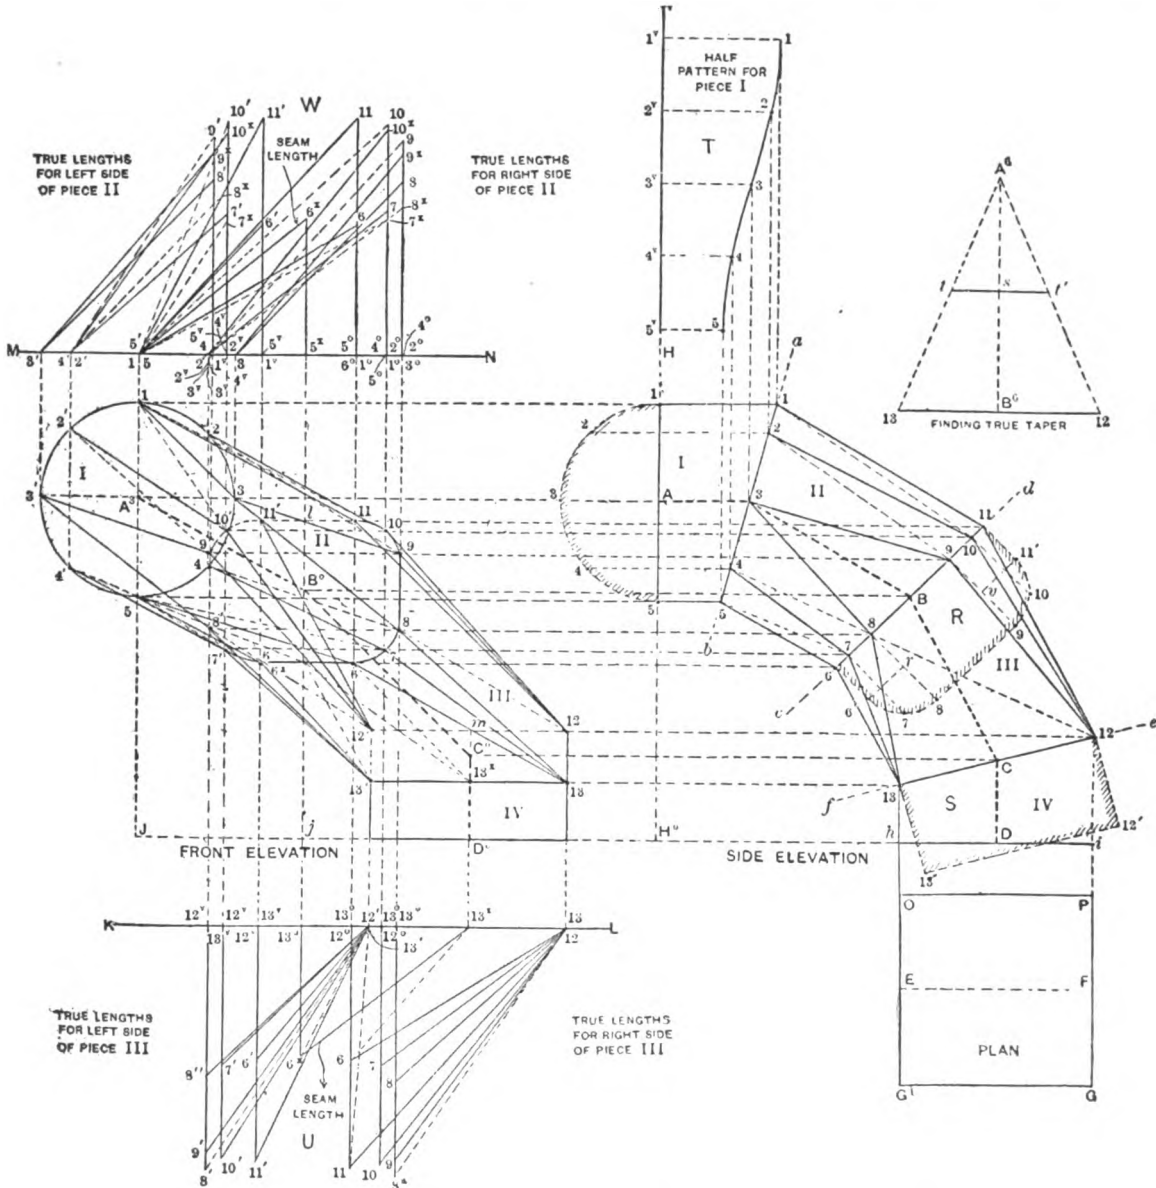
Elevations, Plan, Diagram of Triangles, Pattern and True Taper
